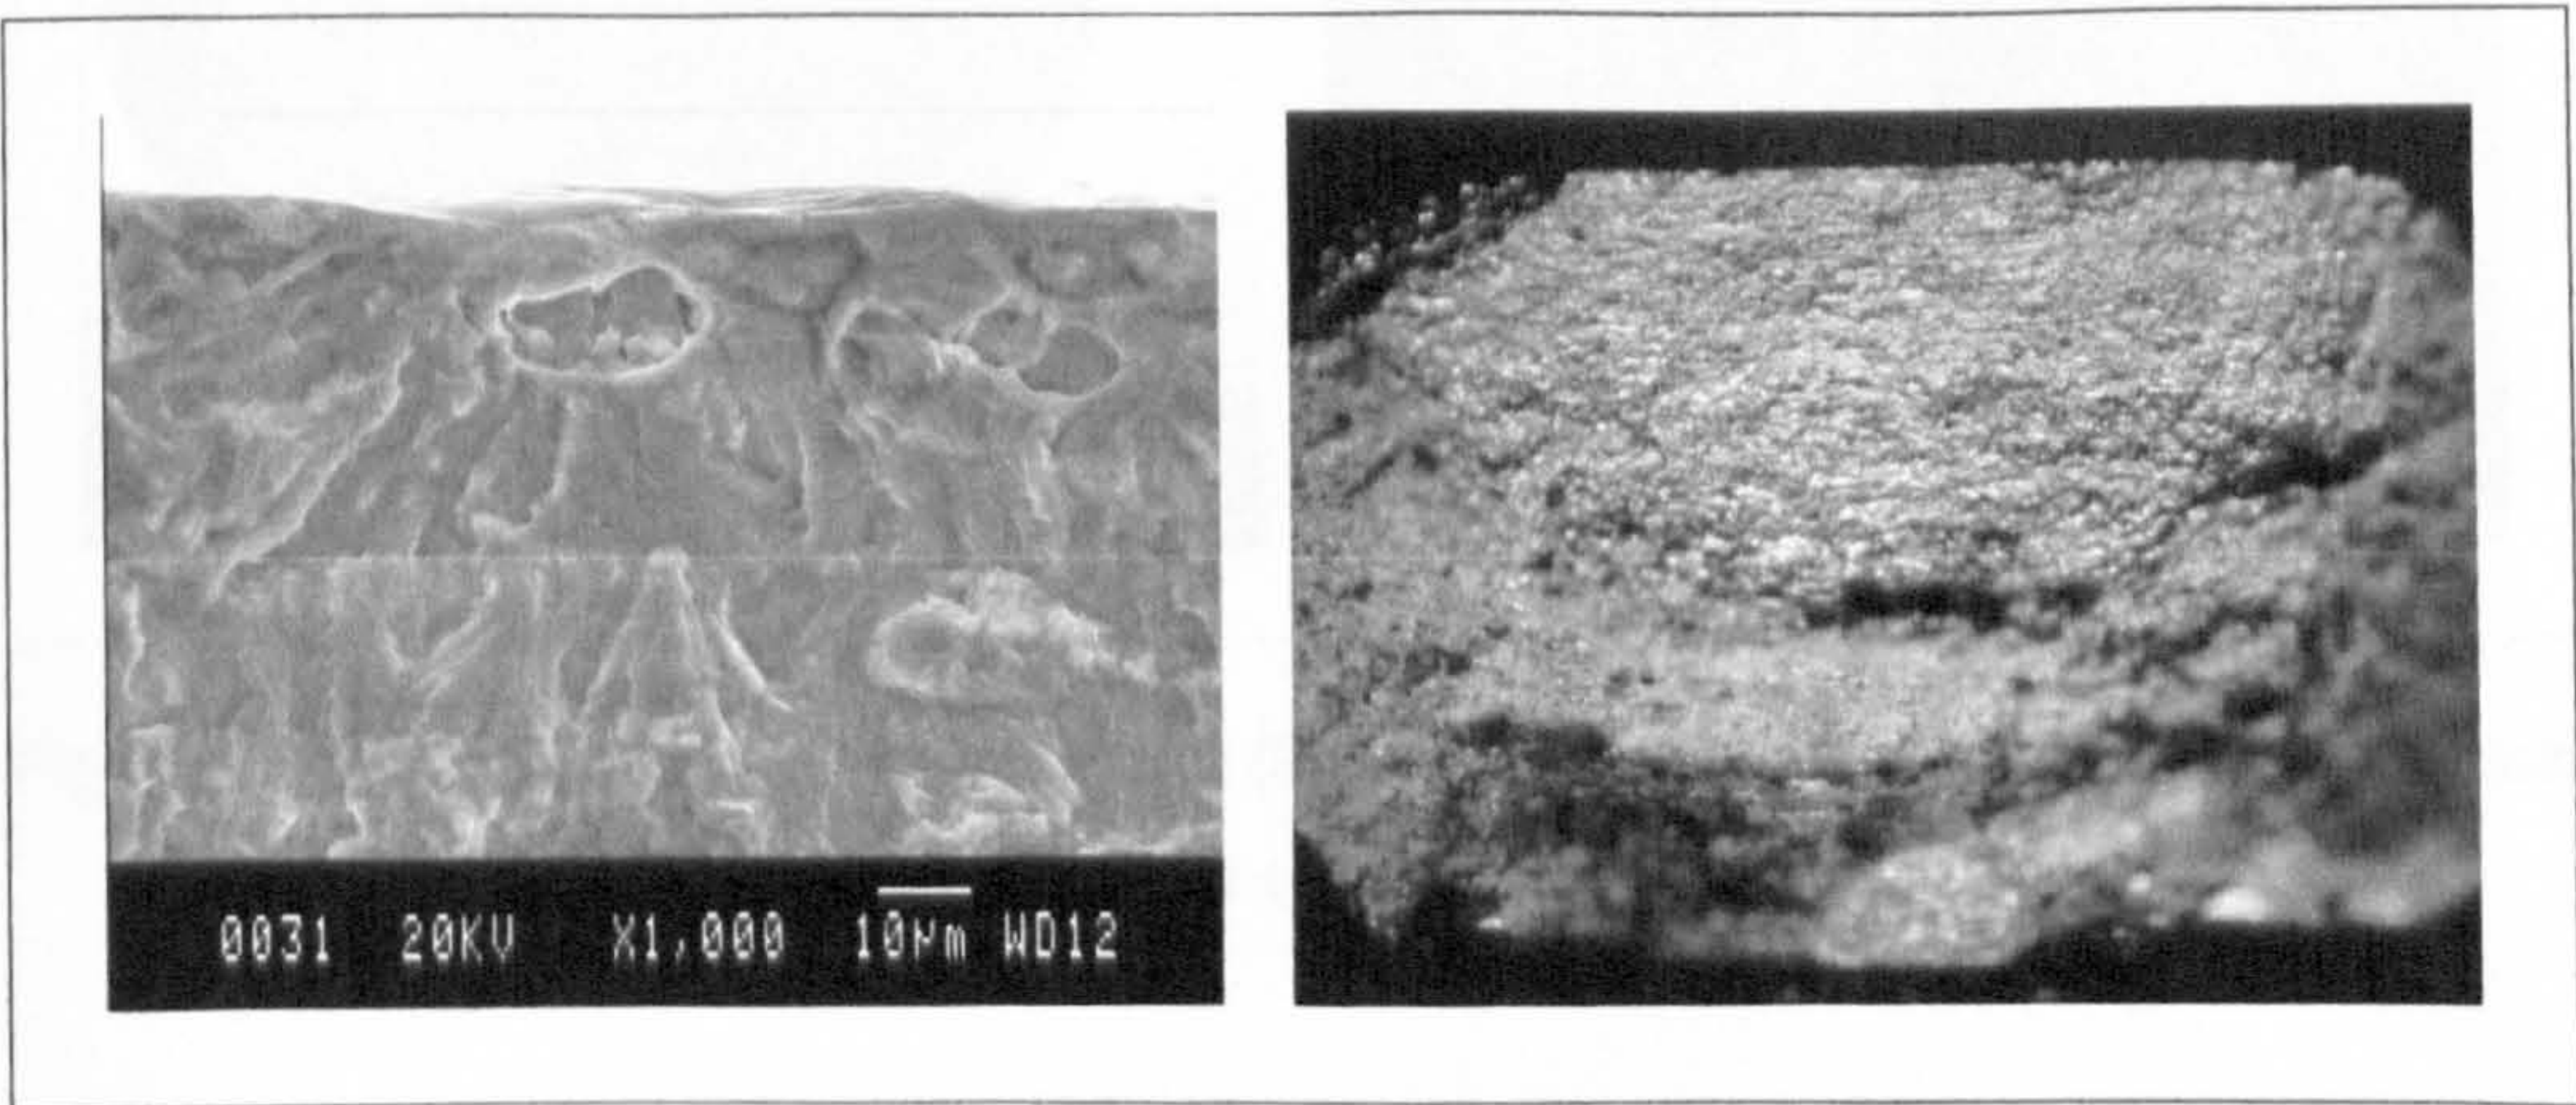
FS DPA SCG 1 intermetallic induced fatigue crack initiation site (left) and FS DPA SCG 8 fracture surface, cause of initiation unknown (right).
